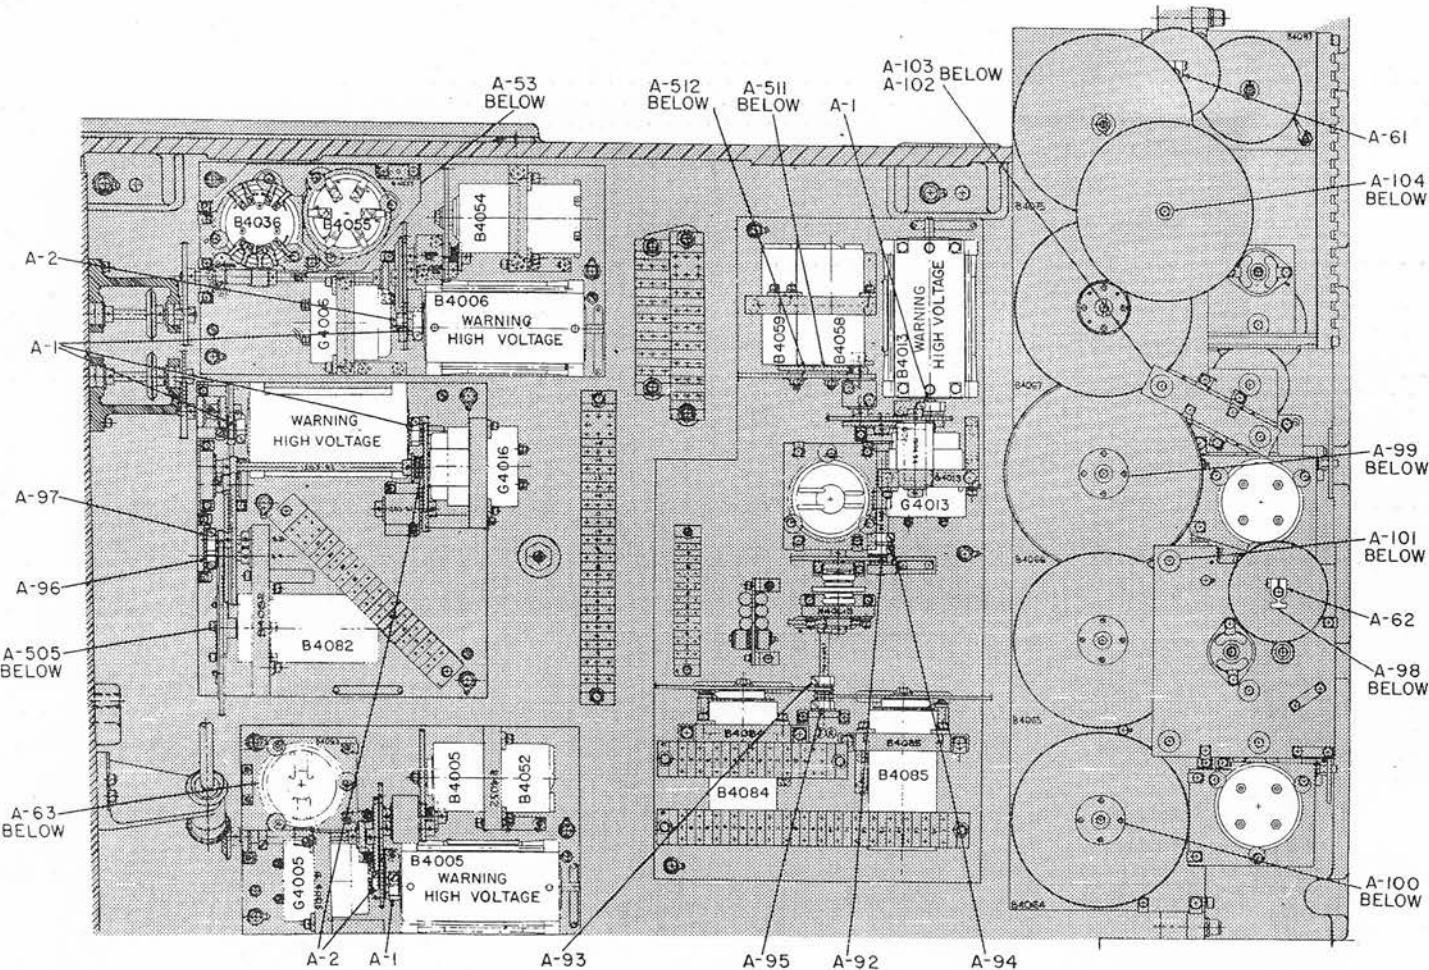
Mechanical Section Left Wall as Viewed from Right Side
